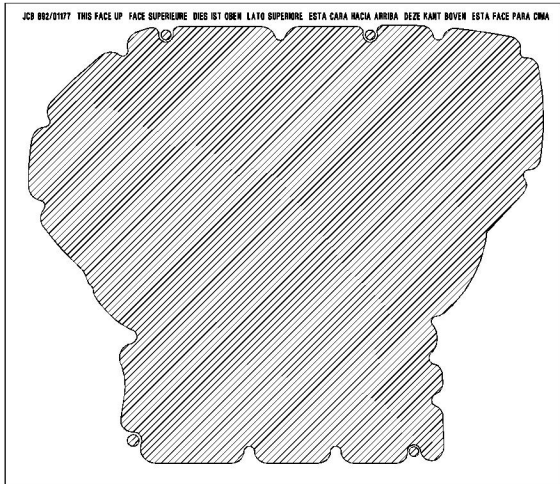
892/01176 Template For Application Of Flywheel Housing To Gear Case Anaerobic Sealant
